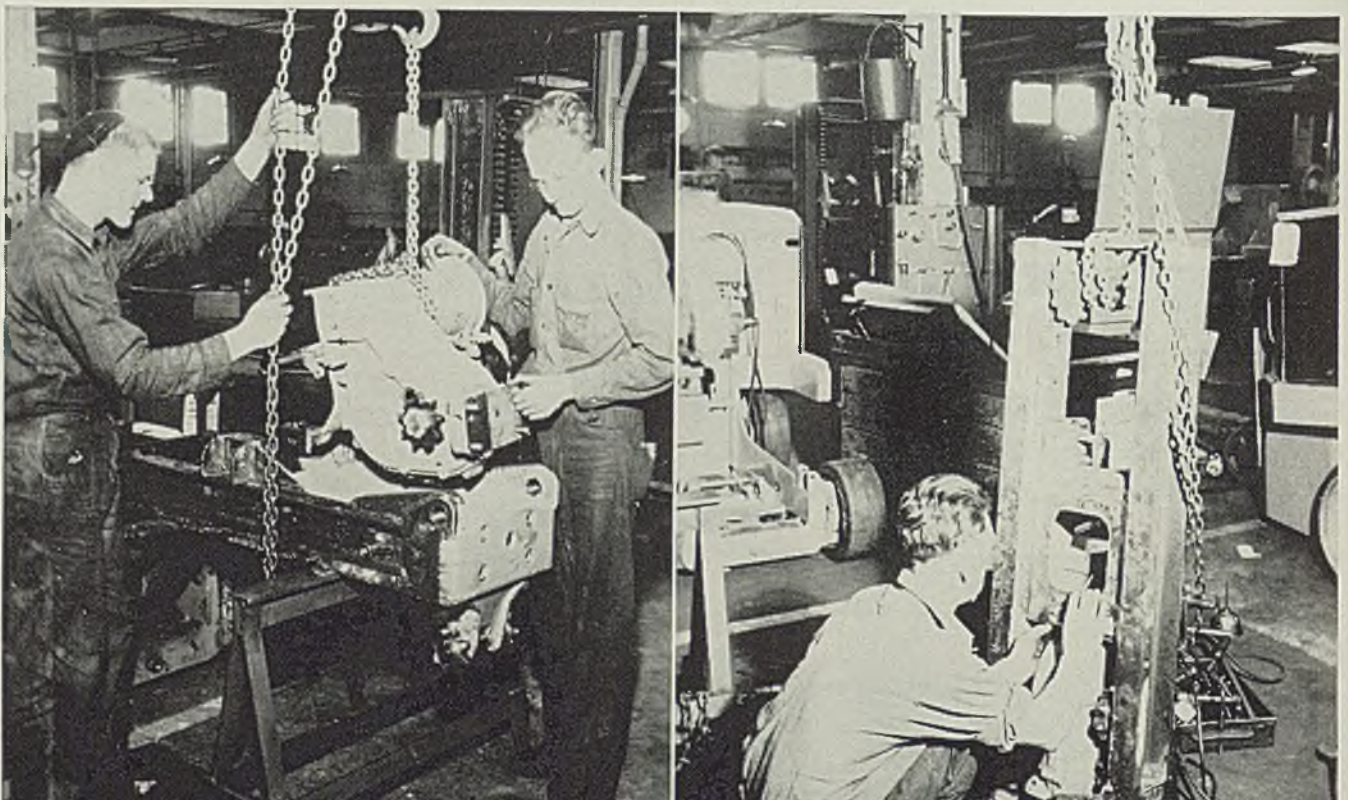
As many subassemblies as possible are made up before the main assembly operation takes place. Illustration at right shows elevating mechanism and guides being put together
